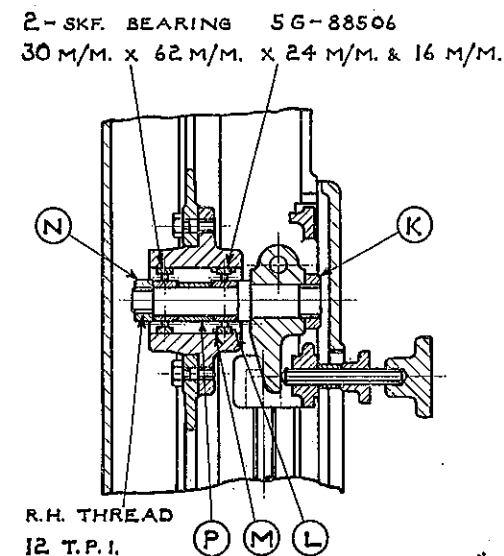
SECTION THROUGH TOP PULLEY SPINDLE.
